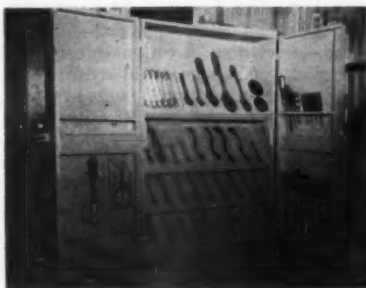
Miscellaneous small hand tool storage cabinet. The tool cabinet shown in this picture provides a storage place for each tool. The important characteristic of this cabinet is that only one particular tool will fit in each storage space. Therefore, at the end of the shop period the cabinet can be inspected at a glance and if a tool is missing it can be located before the students are dismissed.
